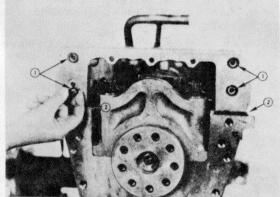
N-40. Install the Pan Adapter to the Flywheel Housing Seats FLYWHEEL HOUSING
